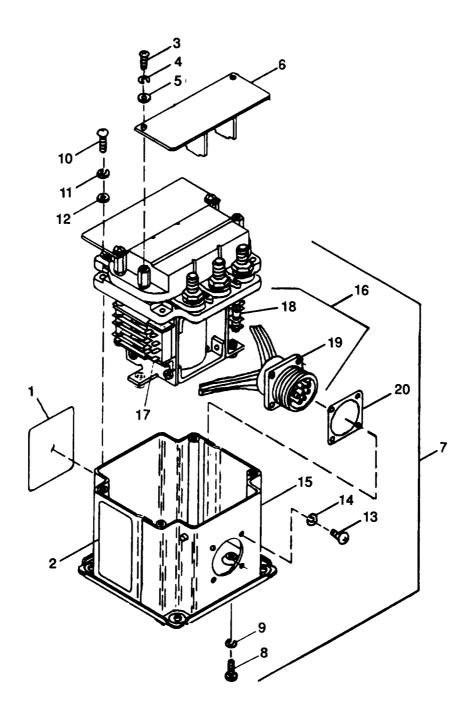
Main Load Contactor (Type A), Exploded View (Sheet 3 of 3)
